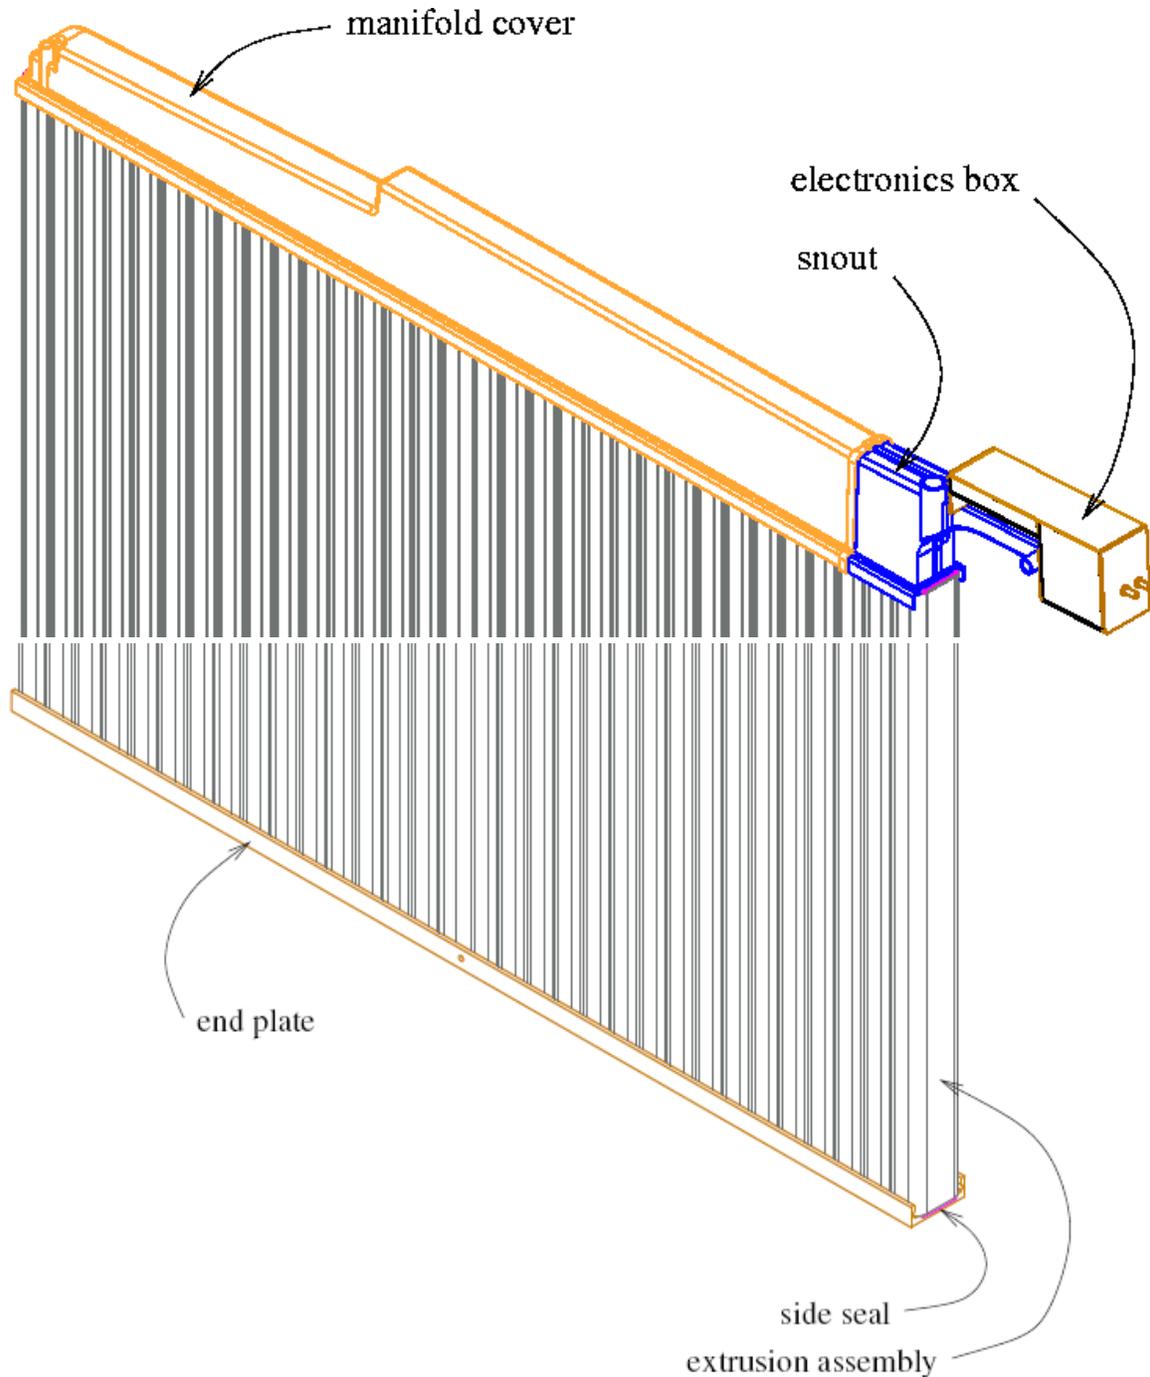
PVC module assembly showing the end plate at the bottom and the fiber manifold at the top. Both vertical and horizontal modules have the same configuration.
